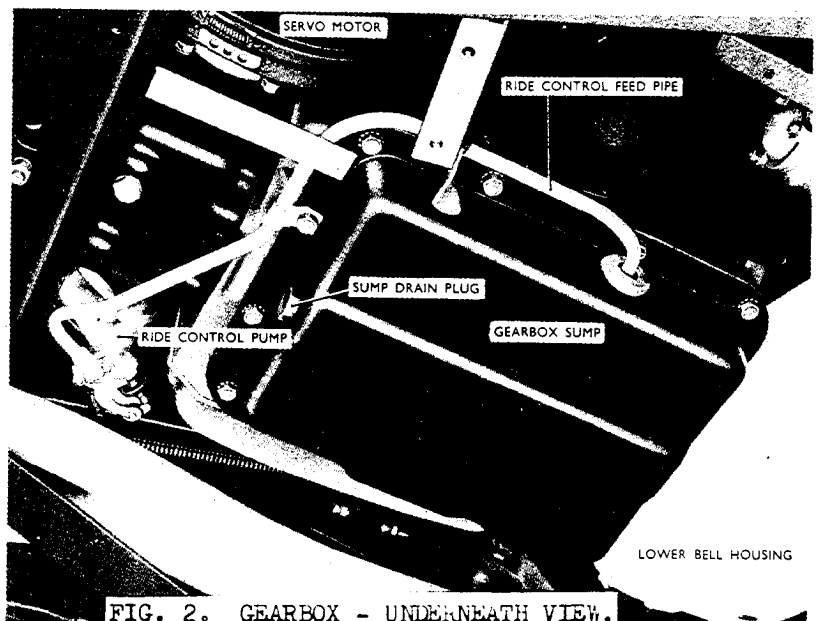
GEARBOX - UNDERNEATH VIEW.
